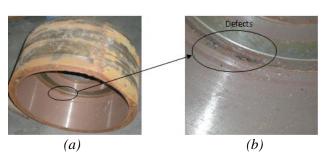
Defects exist on the surface of casting with mechanical processing: a) trialproduction, b) detail with enlarged scale.
